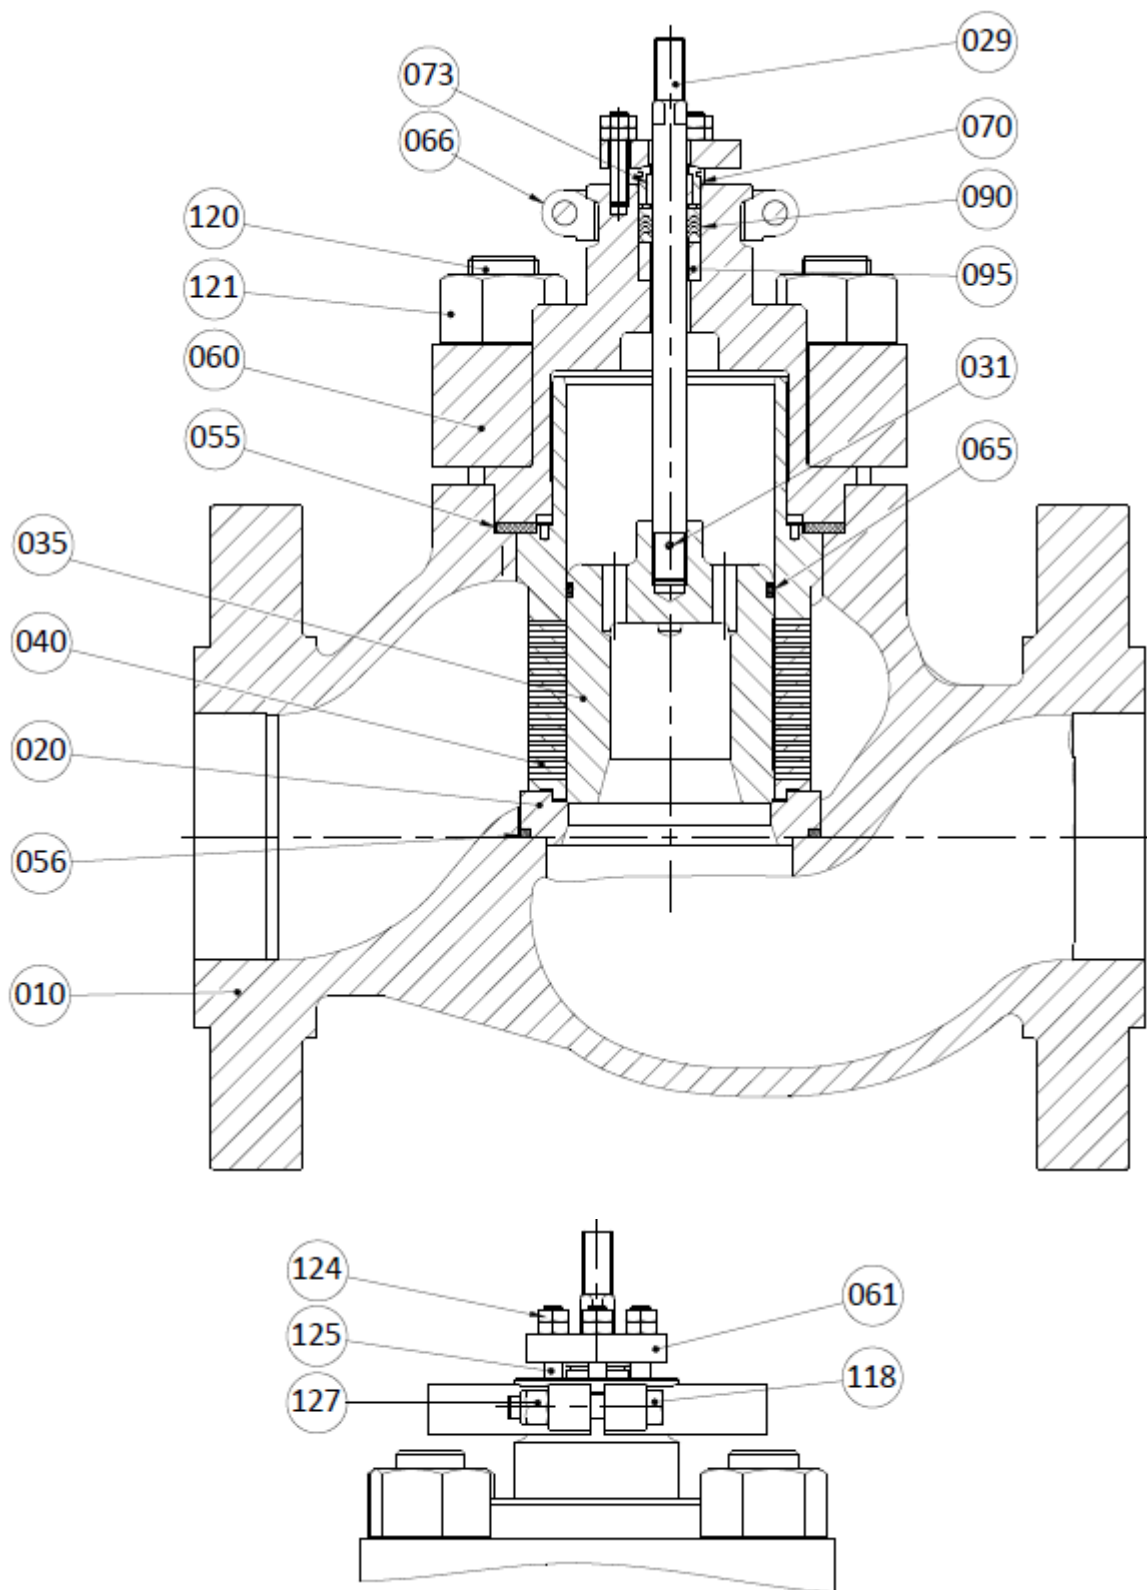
G-Stream Control Valve Cage guided TRIM
